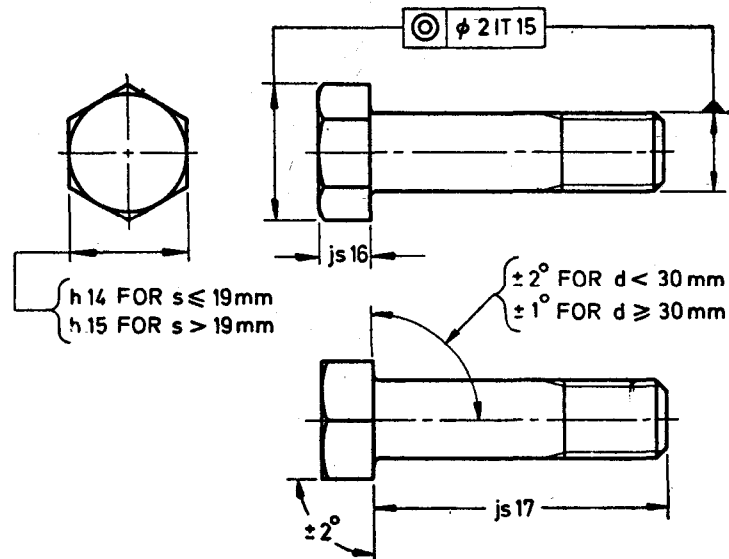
TOLERANCES FOR HEXAGON BOLTS FOR STEEL STRUCTURES
